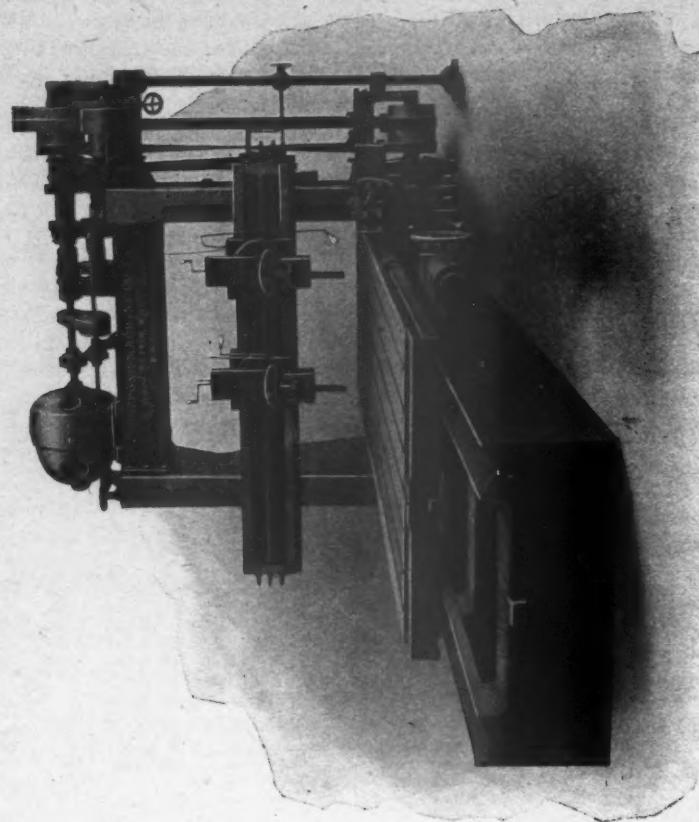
96-IN. BY 24-FT. PLANER.—L. W. POND MACHINE & FOUNDRY COMPANY.
